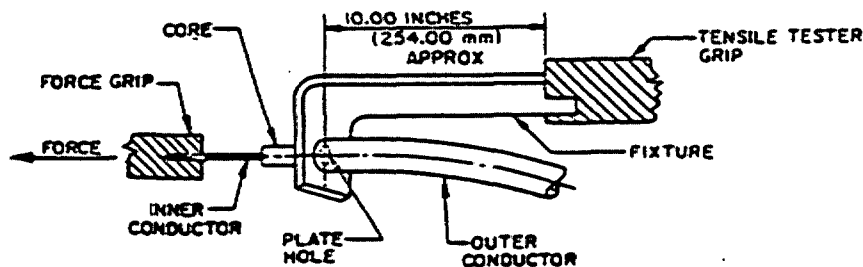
B: Typical Test Fixture for Use with Semi-rigid Cables.
